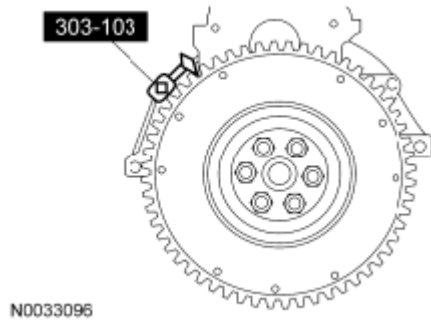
Identifying Flywheel Holding Tool On Flywheel
